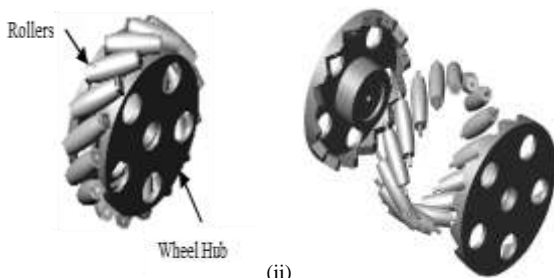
(i) Basis components of Mecanum wheel (ii) exploded view of Mecanum wheel
